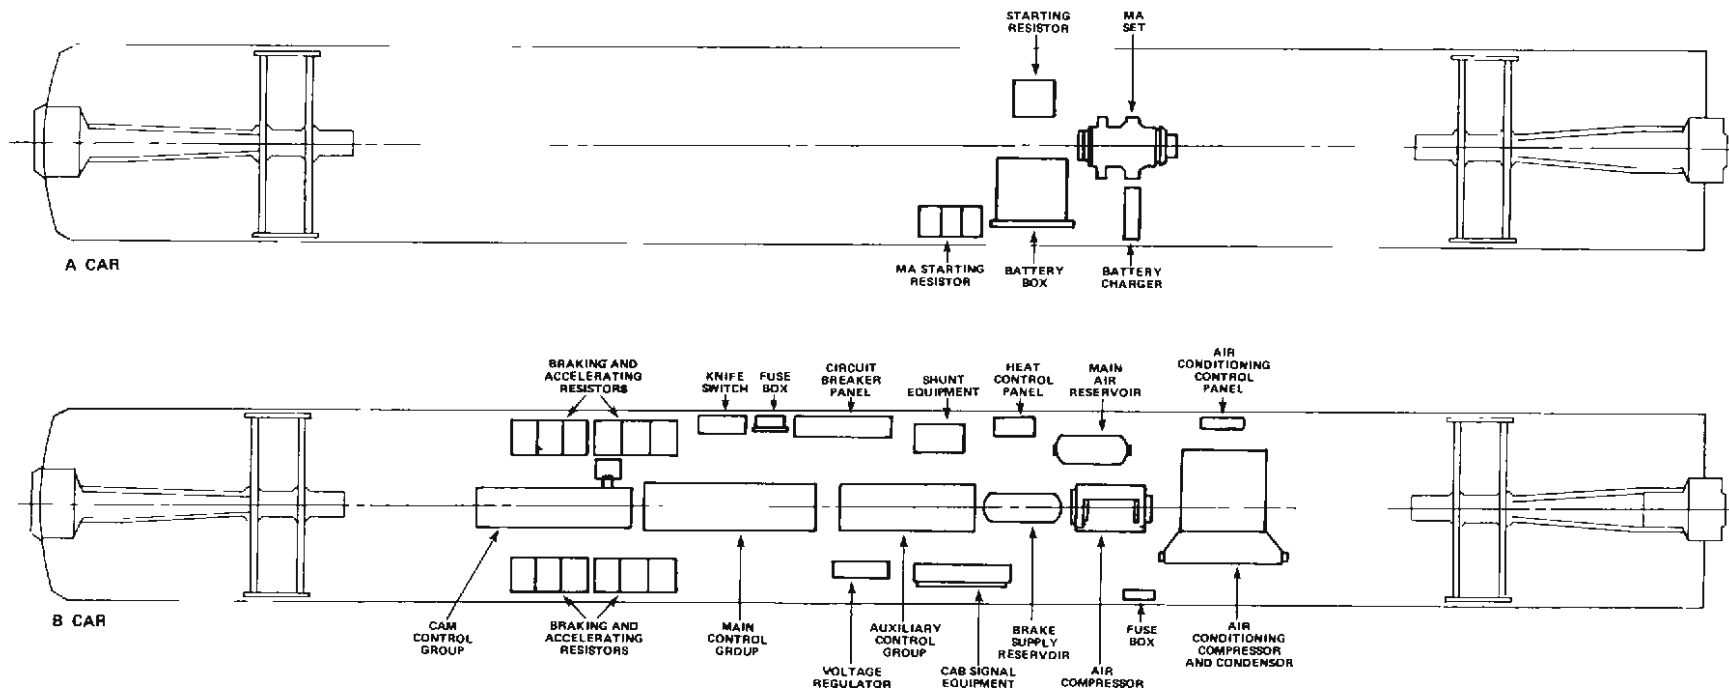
M-1 Underfloor Equipment Arrangement
